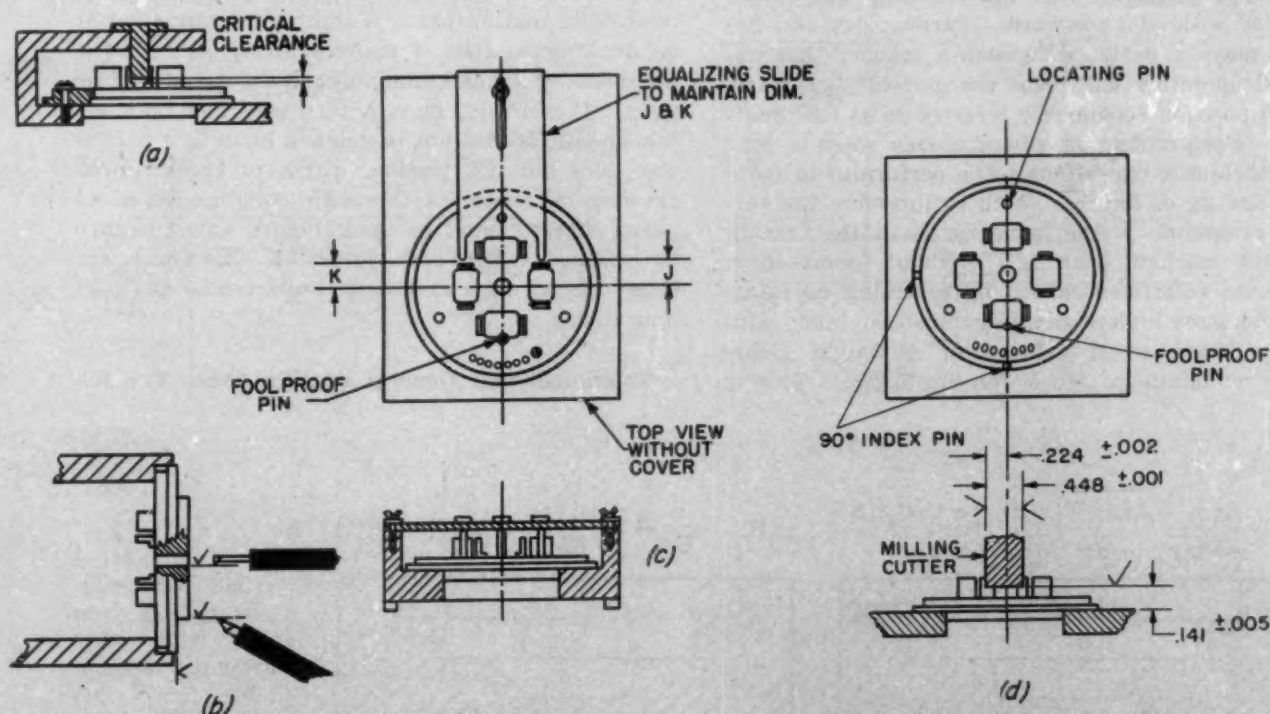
Design application of roller plate part shown in *Fig. 5* is indicated at *a* with first operation turning chuck or collet fixture at *b*, second operation drill jig at *c*, and third operation milling fixture at *d
